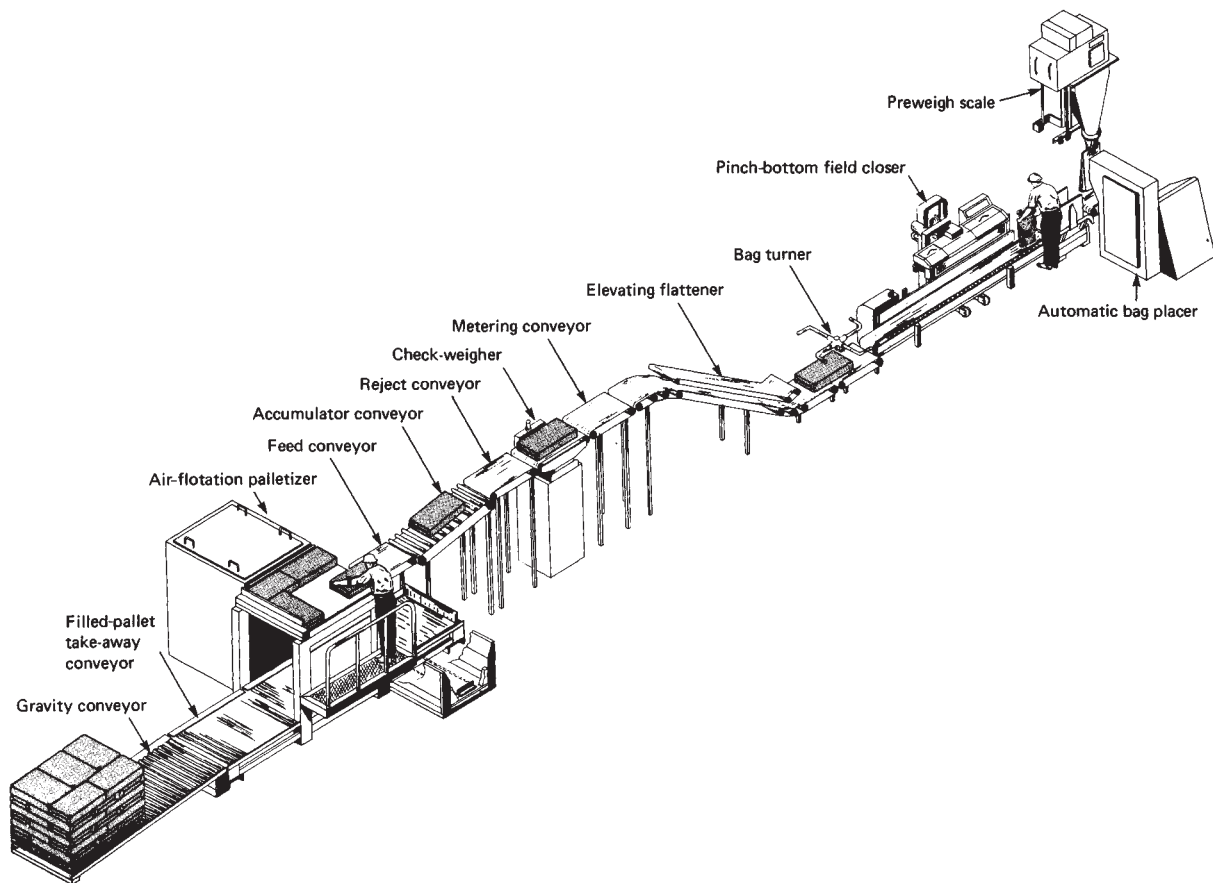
Typical pinch-bottom system with automatic bag hanging and semiautomatic palletizing. Filled bags are handled on pallets only. (Courtesy of Stone Container Corp.)
